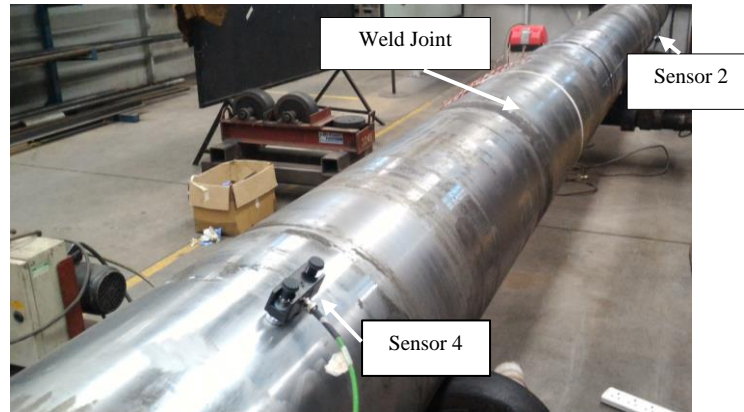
Afar sensor arrangement approximately  $L = 220$  cm from the weld joint.
